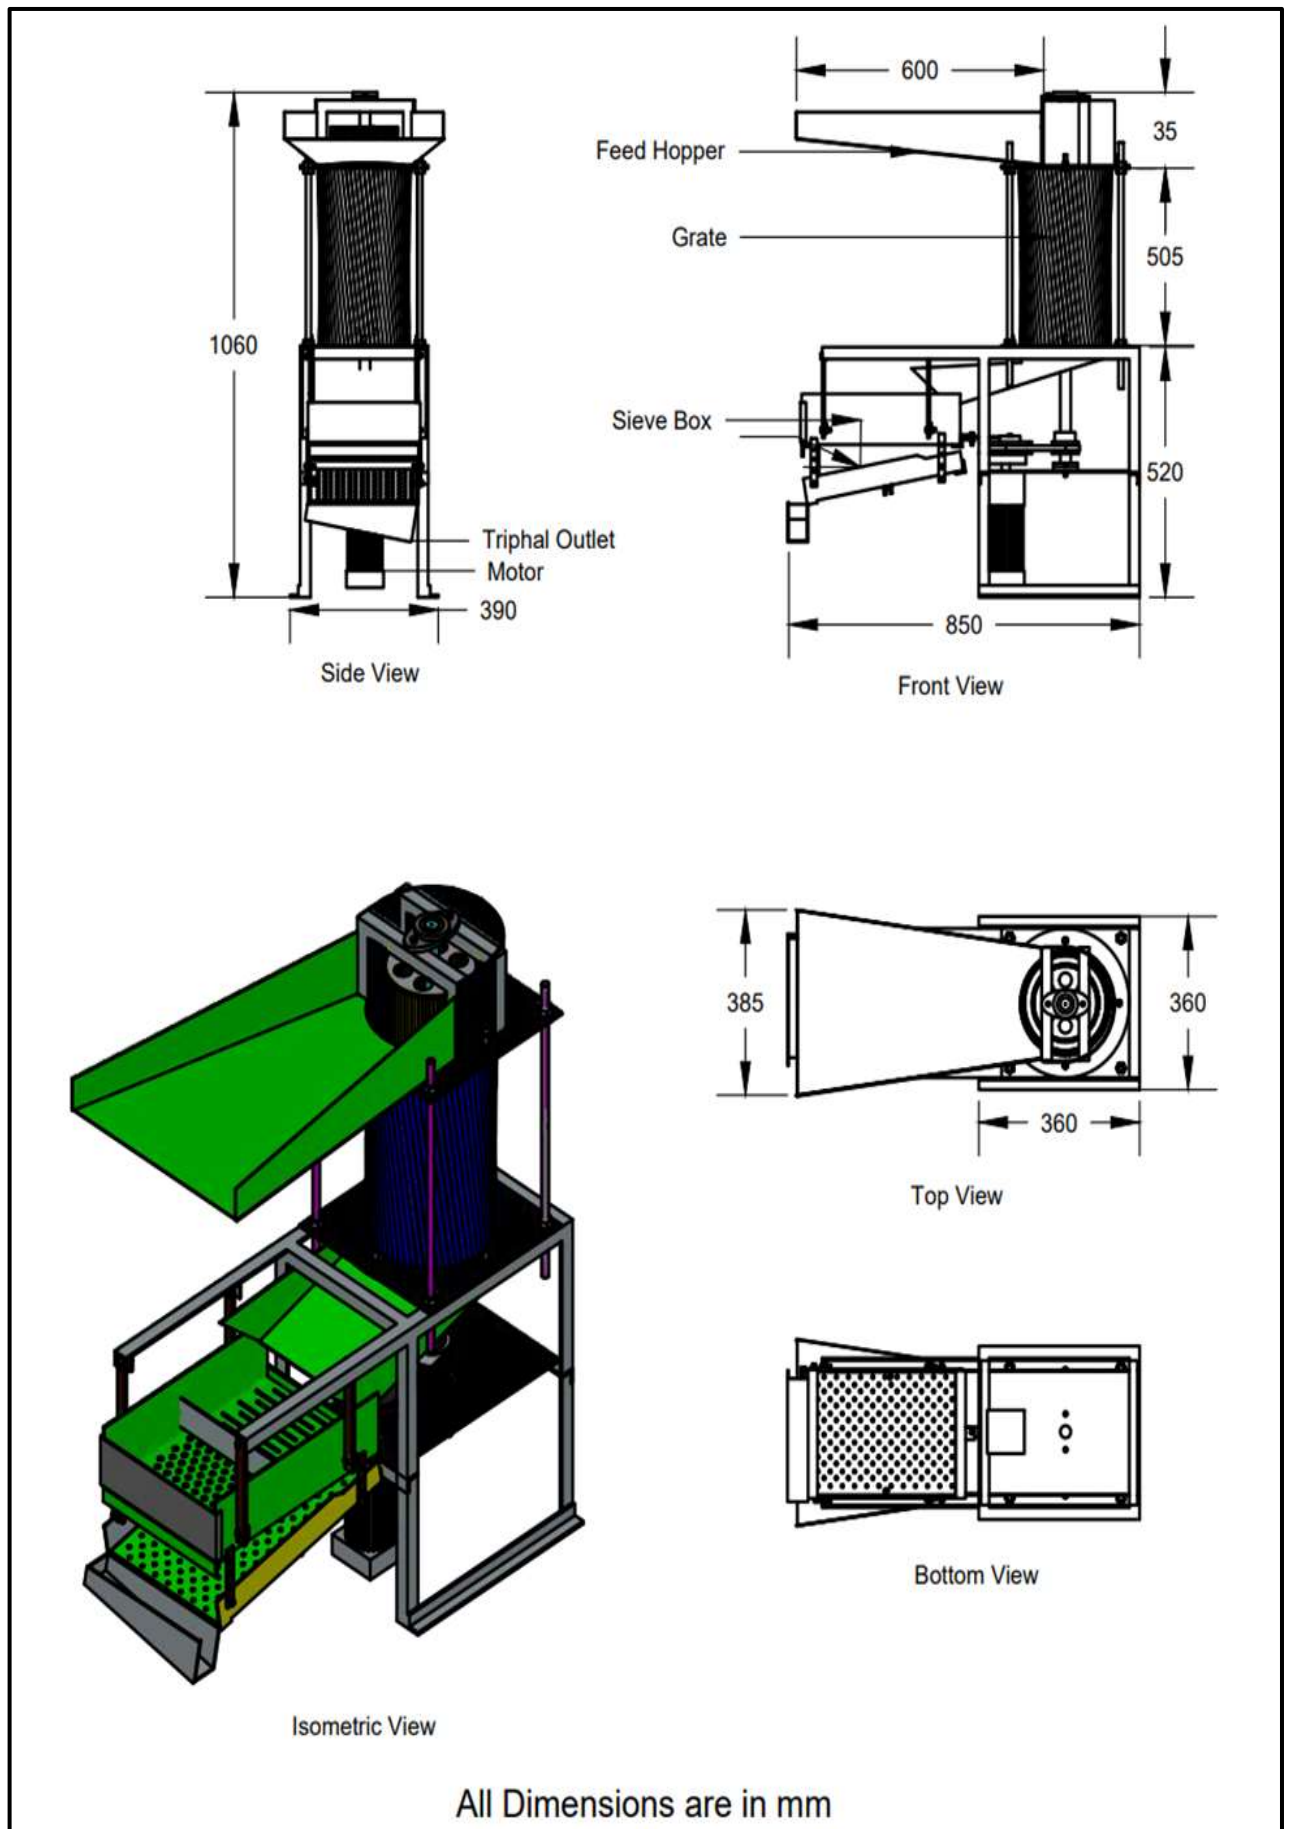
Completely Assembled Developed Triphal Peeling Unit
